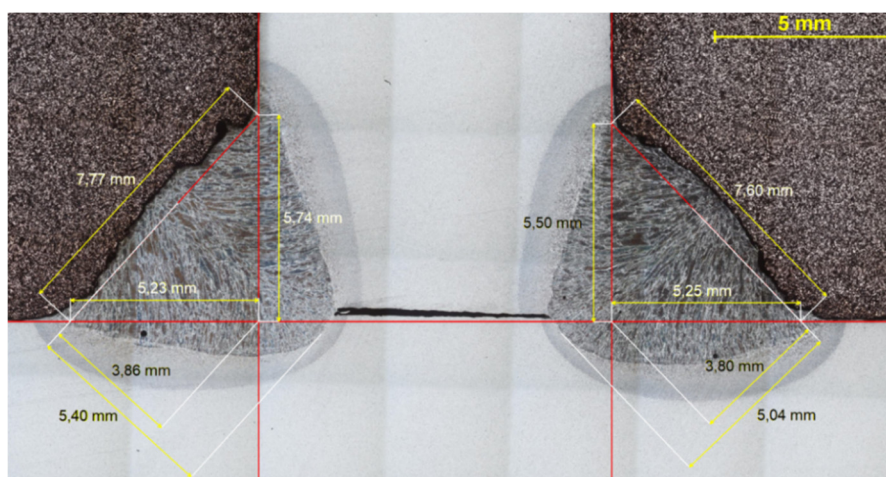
Metallographic sample of Weld Q8 ($Q = 8 \text{ kJ}\cdot\text{cm}^{-1}$)—1st bead (right) and 2nd bead (left).
